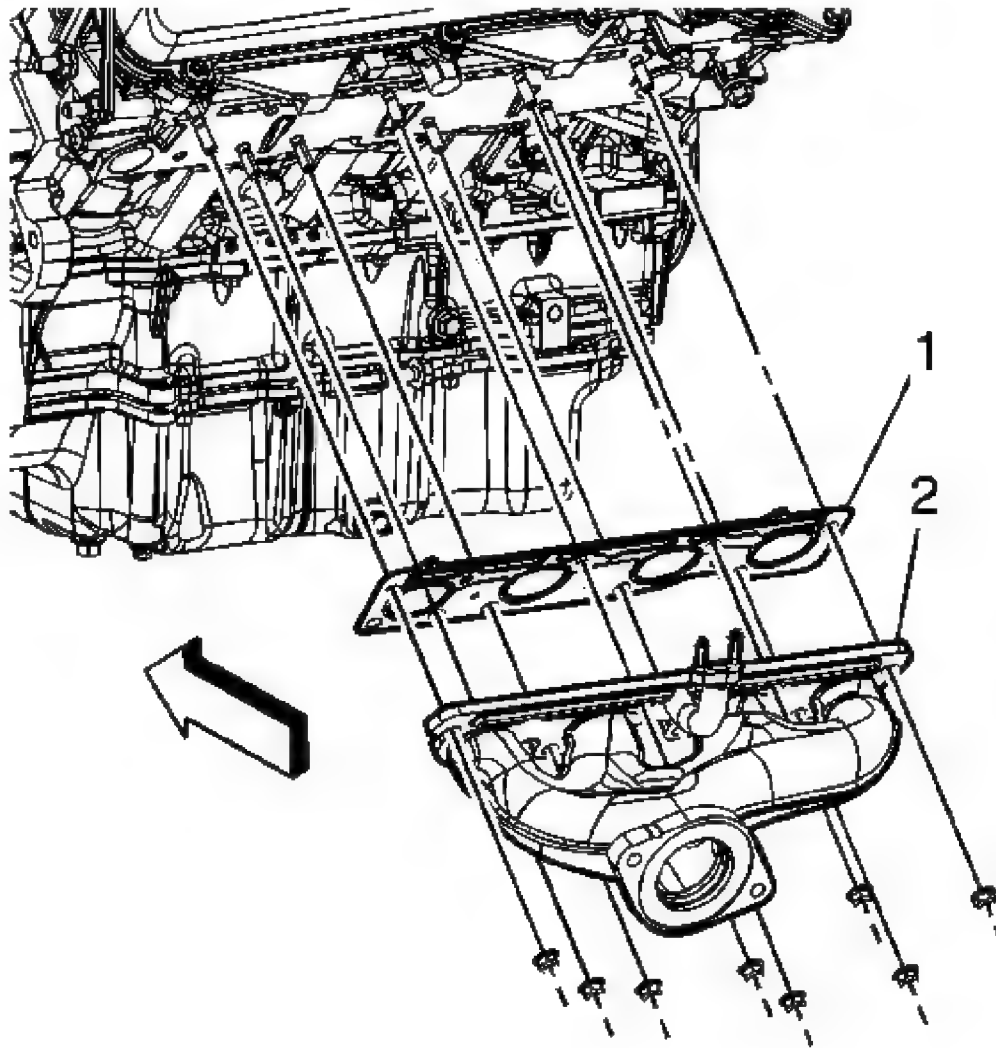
Removing/Installing Exhaust Manifold & Gasket
